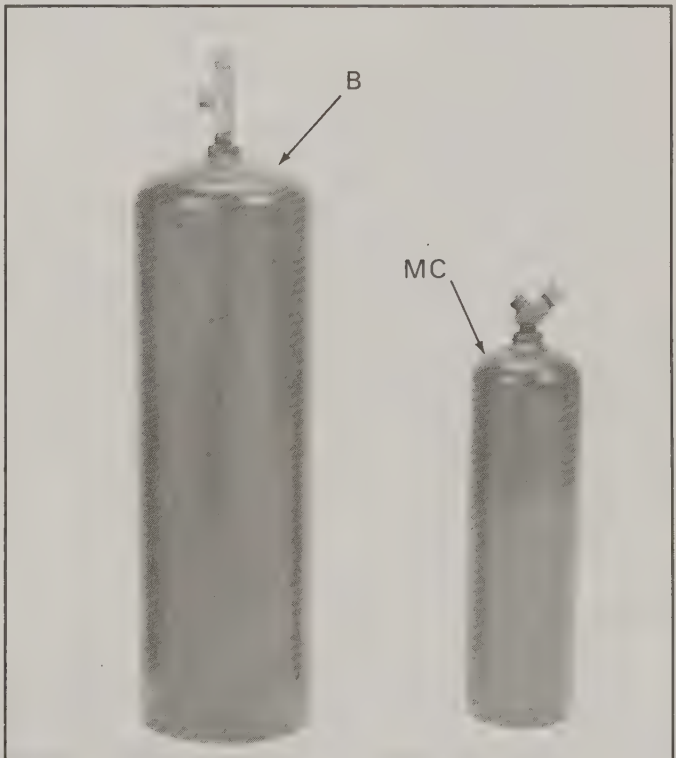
Common acetylene cylinder sizes are B and MC. The B cylinder holds 40 pounds of acetylene; the MC cylinder holds 10 pounds. (Uniweld)
